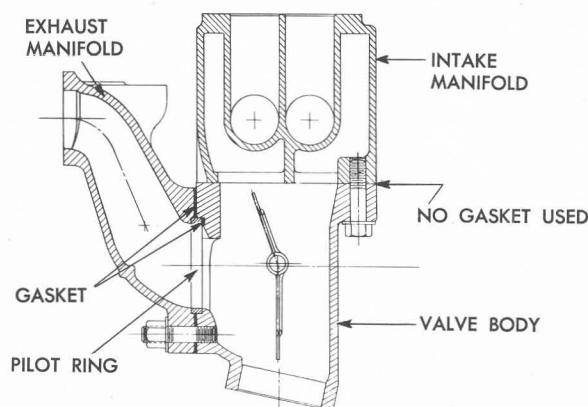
Sectional View of Joints Between Valve Body and Manifolds
